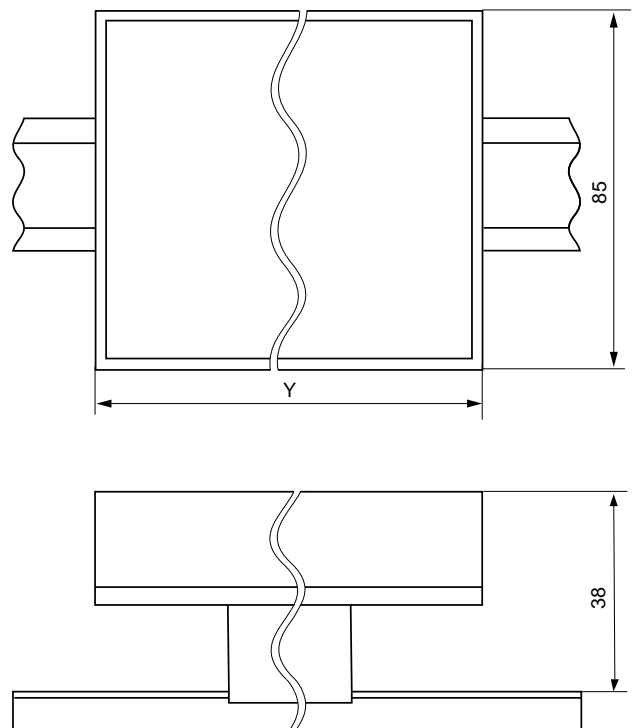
"DMB" DIN-rail mounting bracket dimensions
